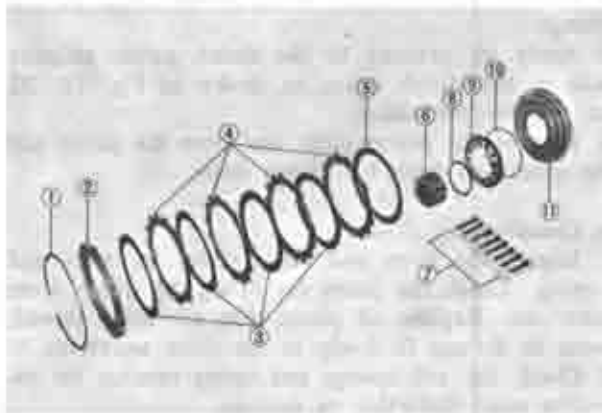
B-33 Fig. 7B-33 Low and reverse brake
